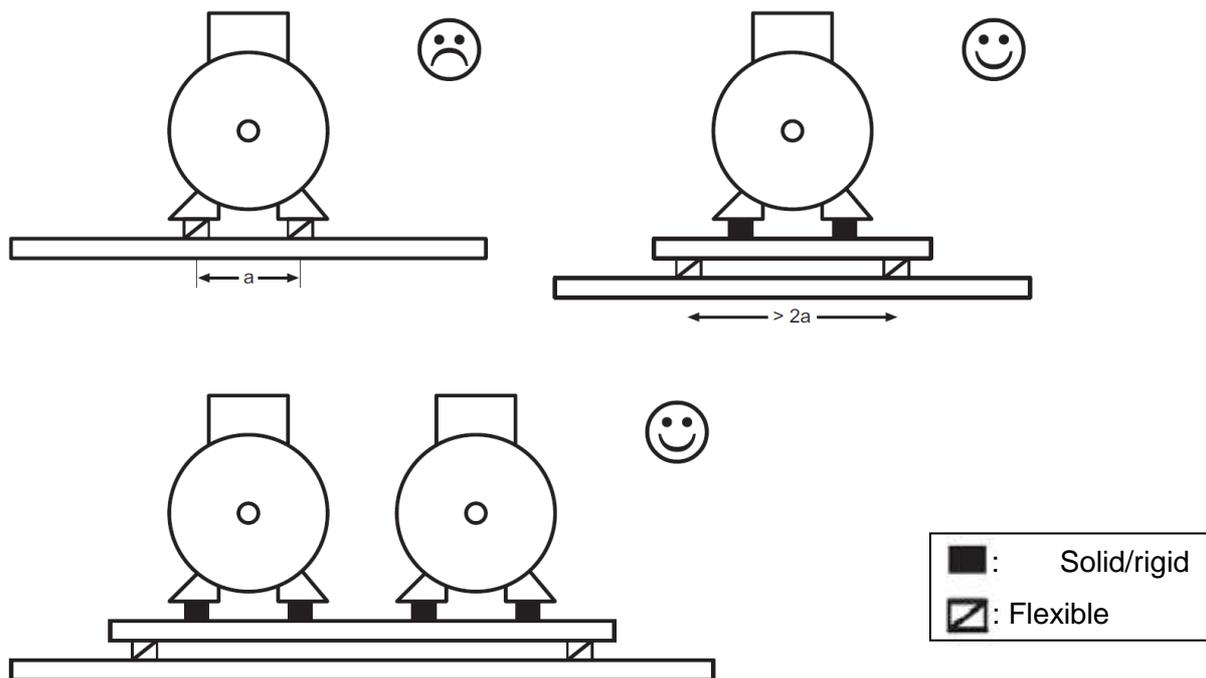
Mounting of reciprocating compressors for variable-speed operation (Example with 2-cylinder reciprocating compressors)
